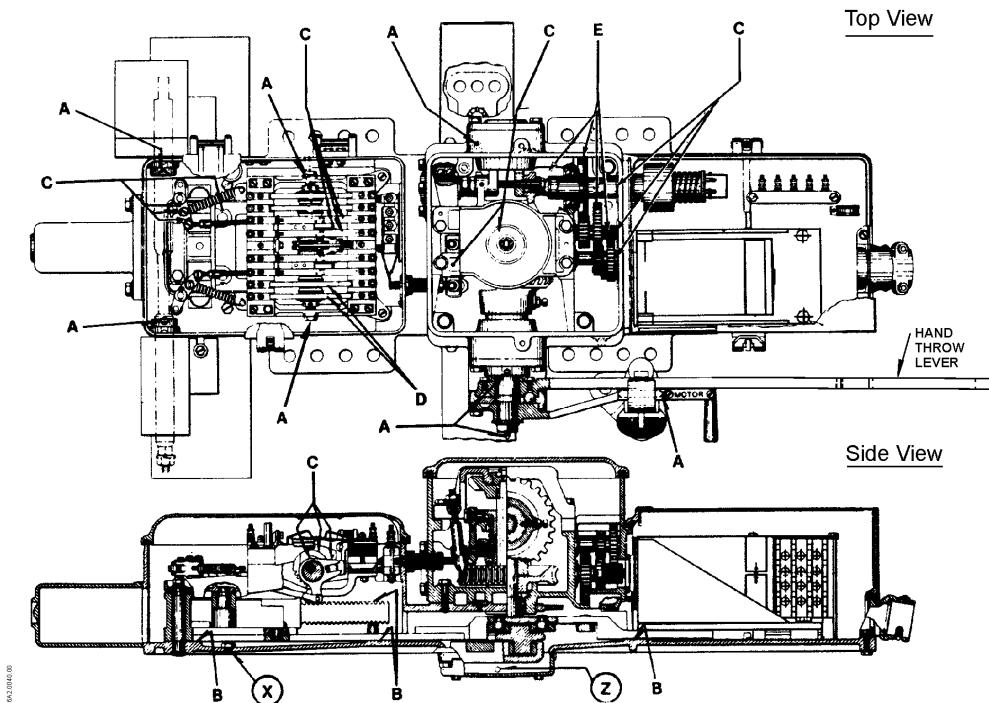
Lubrication Diagram for M-23A and M23-B Switch Machines
